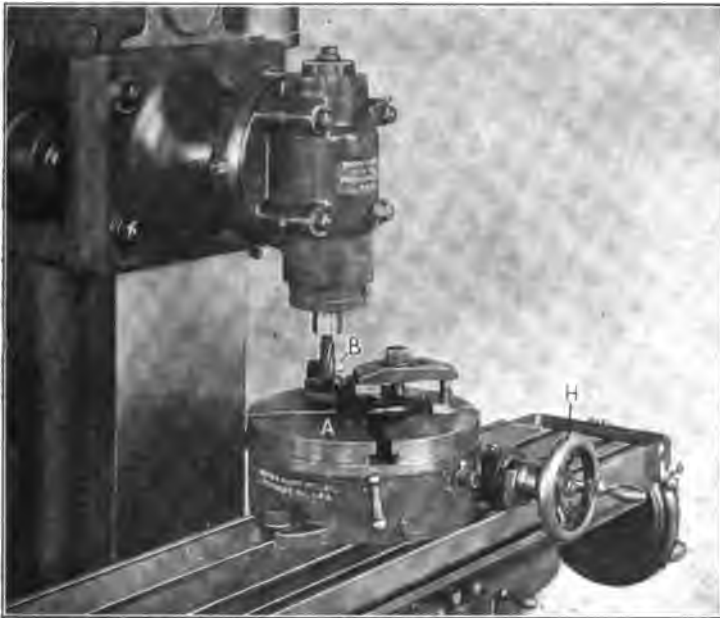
Combined use of Vertical and Circular Milling Attachments
